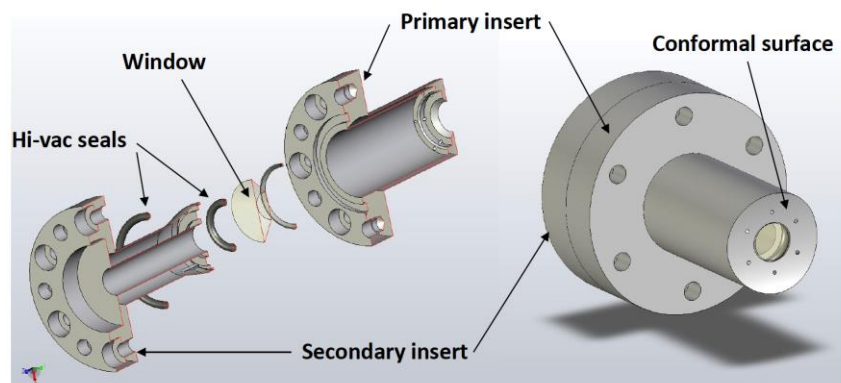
Test section window port. Inside surface of window is tangent to tube wall.
